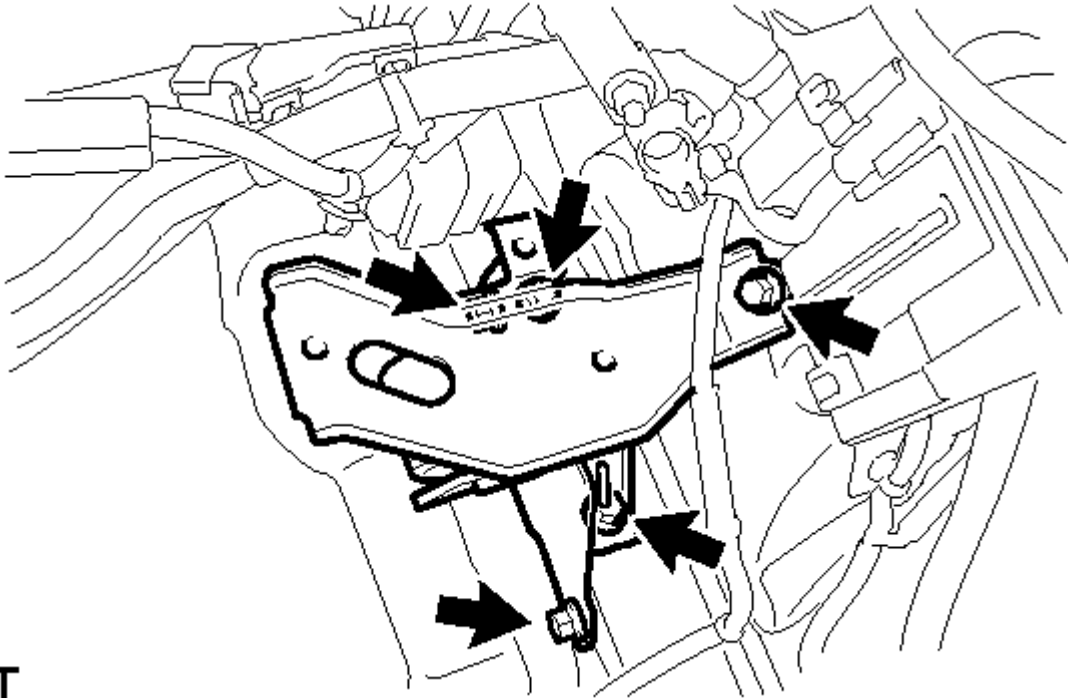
Identifying Bolts Front Suspension Crossmember Bolts
